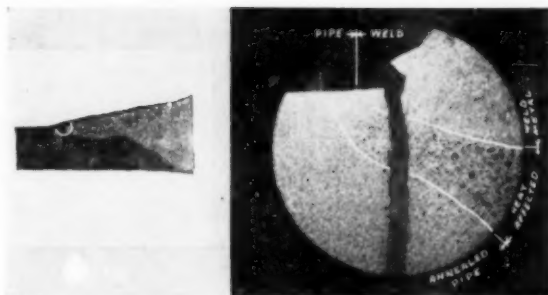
PHOTOMACROGRAPH AND PHOTOMICROGRAPH OF CRACK IN WELDING NECK FLANGE ASSEMBLY
